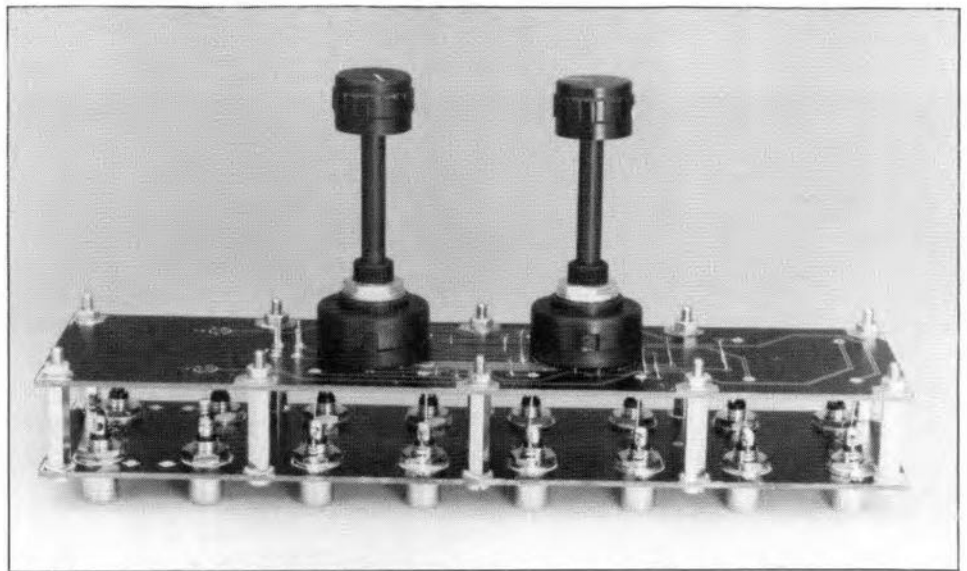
The print for the sockets and that for the rotary switches are assembled into a 'sandwich' with the aid of suitable spacers.
